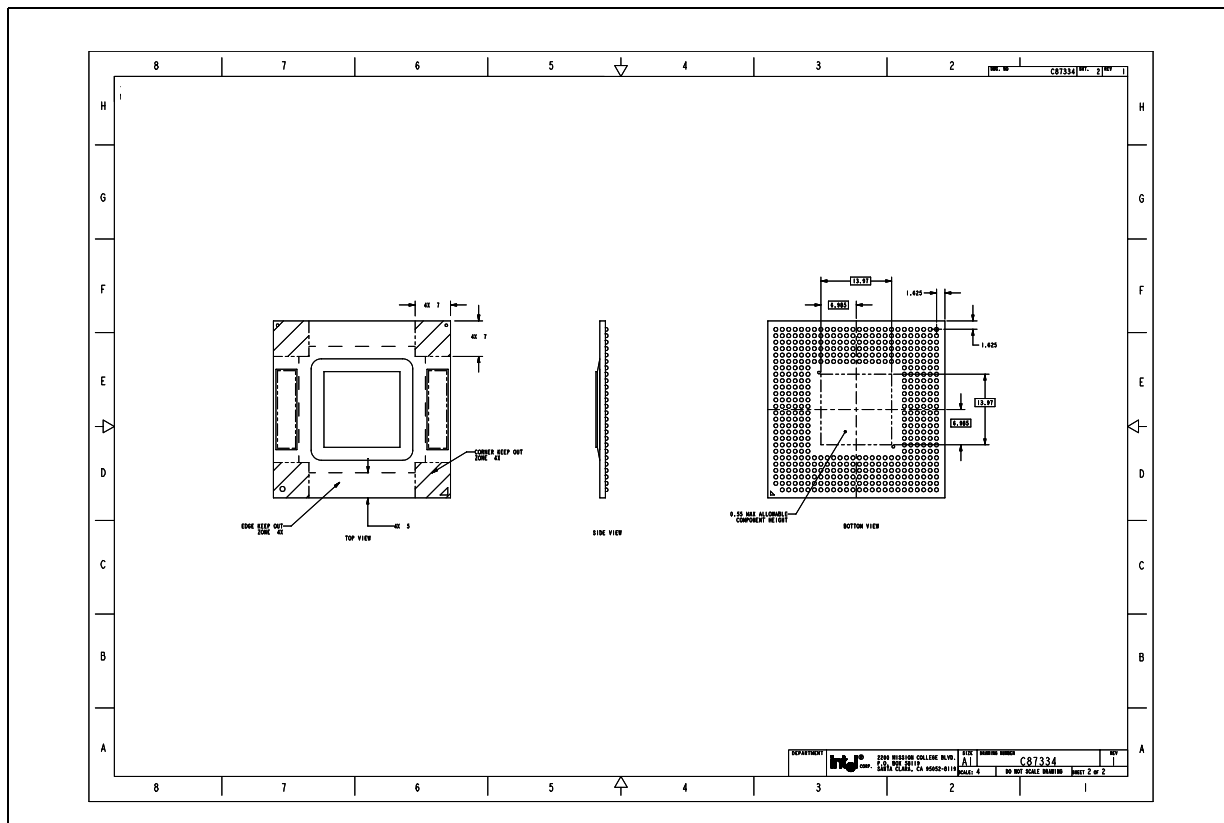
Micro-FCBGA Processor Package Drawing (Sheet 2 of 2)
